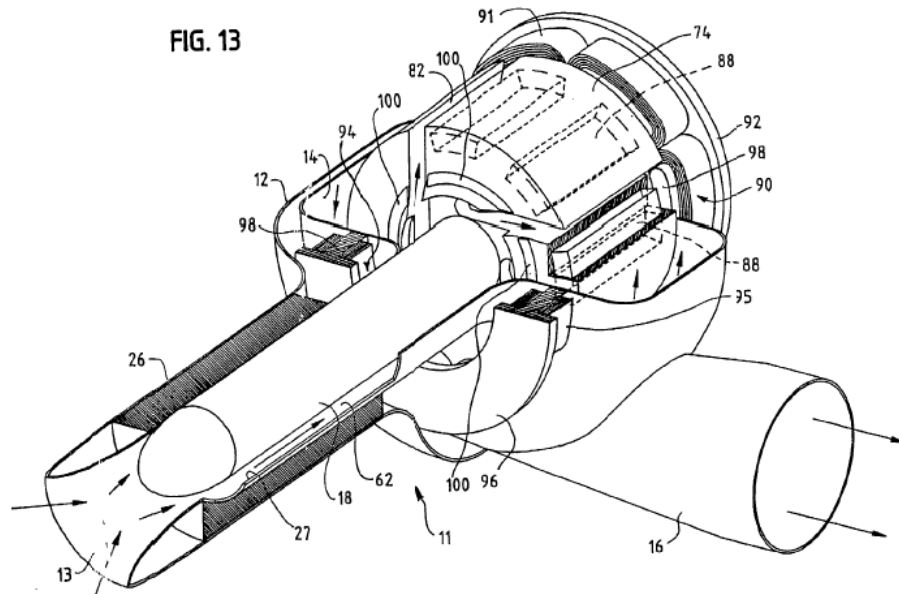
shows a second embodiment of pump 11 that includes first motor stator 90 comprising windings 91 and back iron 92 located at the rear side of impeller 74 between housing 12 and casing 14. *Id.* ¶ 83. Second motor stator 94 comprises windings 95 and back iron 96 fixed to casing 14 on the forward side of impeller 74. *Id.* ¶ 84. Motor stators 90 and 94 are positioned on opposite sides of casing 14 so that each is adjacent to the pole faces of rotor magnets 98. *Id.* ¶ 85.
